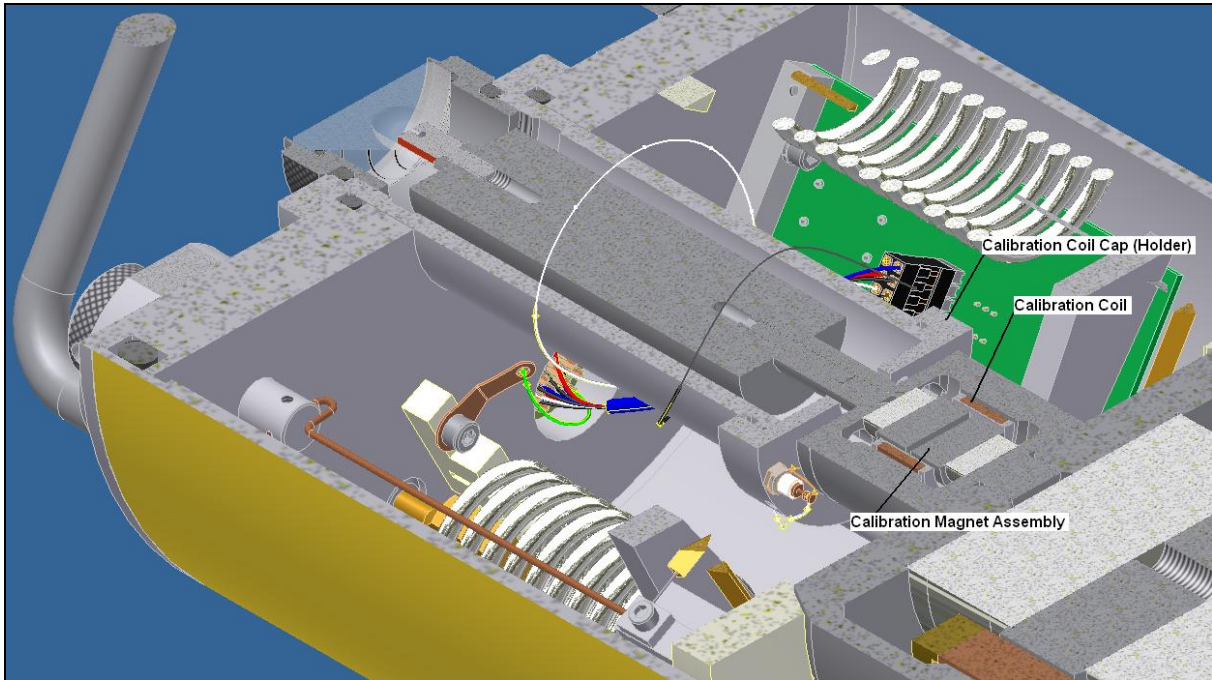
GS-13 Calibration Coil, Holder, and Magnet Assembly.
